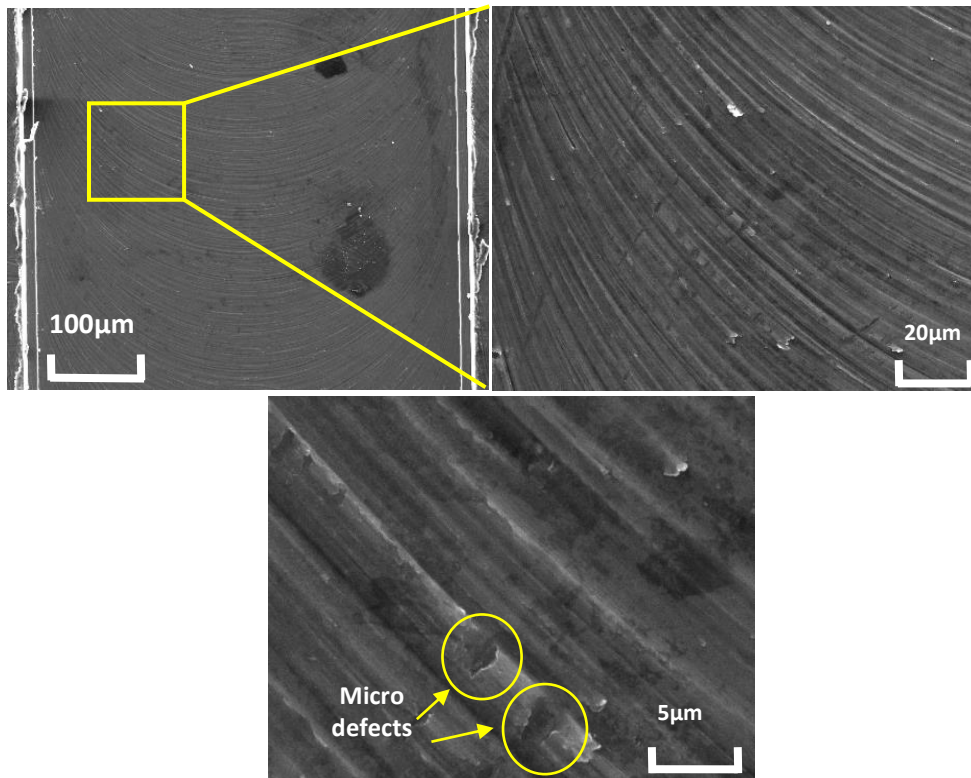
SEM micrographs of machined surface for pure Mg at feed per tooth of 1μm/tooth, spindle speed of 6,000rpm and depth of cut of 30 μm.
